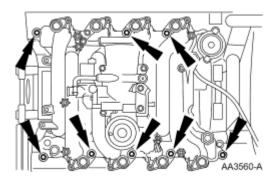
Intake Manifold Bolts Courtesy of FORD MOTOR CO.
